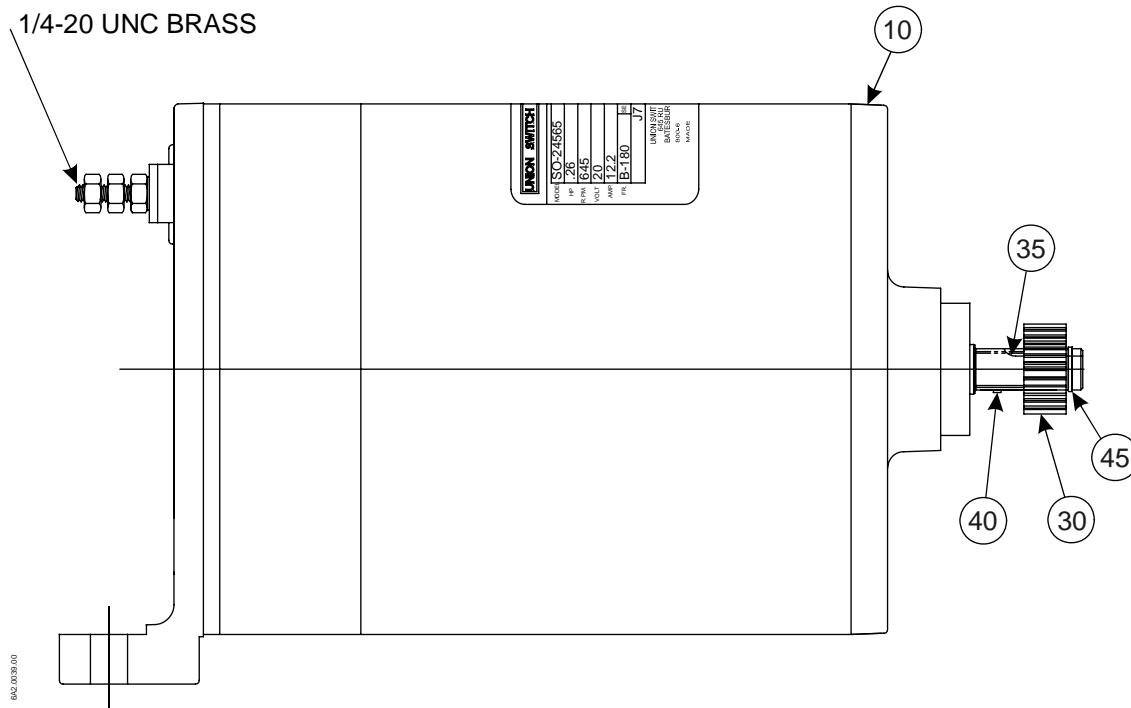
M-3, M-23A, and M-23B "Gray" Motor Assembly
